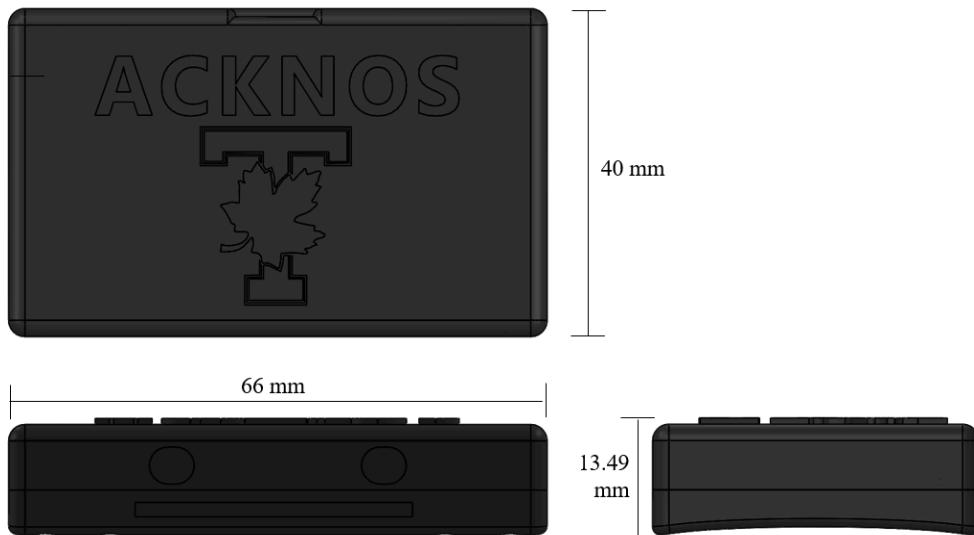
Dimensions of the battery housing design. Note that the LCD housing design dimensions are identical to the battery housing design.
